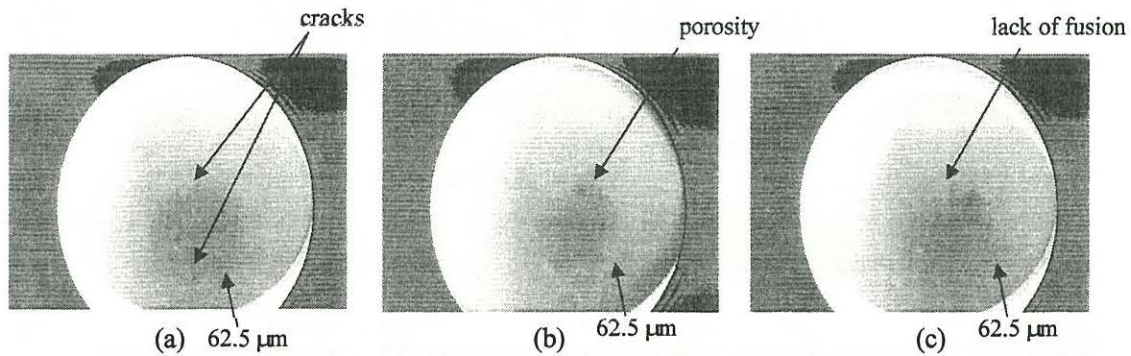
X-RAY INSPECTION OF STAINLESS STEEL MINI-ELEMENT WELDED BY Nd:YAG LASER (a) CRACKS, (b) POROSITY, (c) LACK OF FUSION
